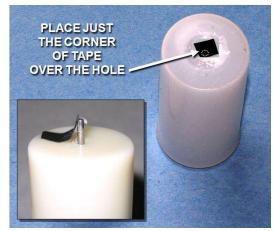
Tape Placed Over the Edge of the Shaft Hole in a Thruster Housing
